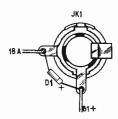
Detail of the bell jack socket (JK1) showing the mounting of D1
